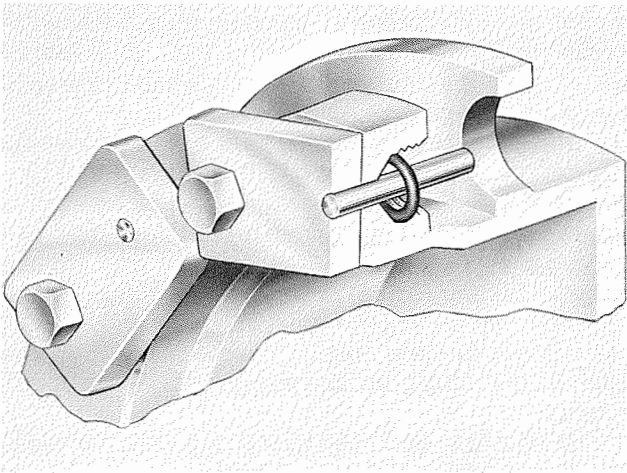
B. Adapter with Locators and Seal Rings Installed
